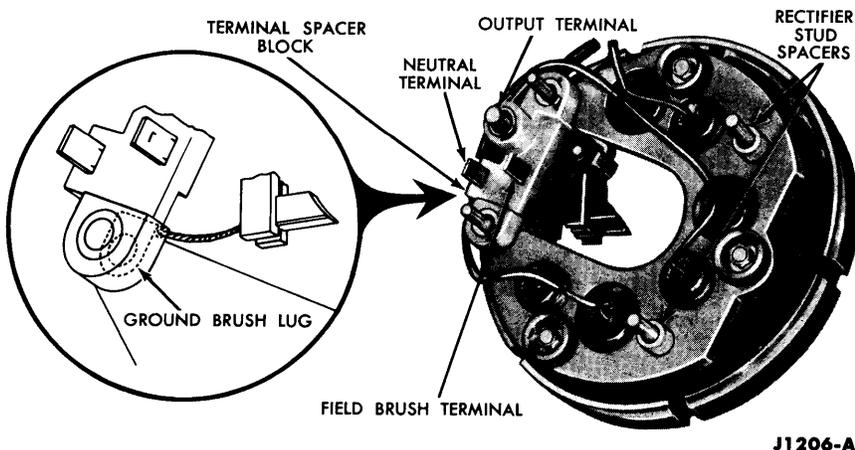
Stator, Heat Sink and Terminal Spacer Block Assembly
